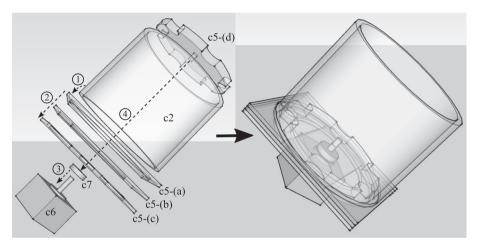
Assembly of the core part; c2, c5, c6 and c7 are described in the Section 3.1; circled numbers represent order of assembly.
